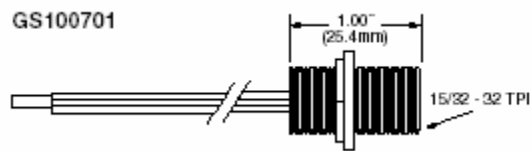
GS100701 Gear Tooth Sensor (Courtesy Cherry Sensor)
